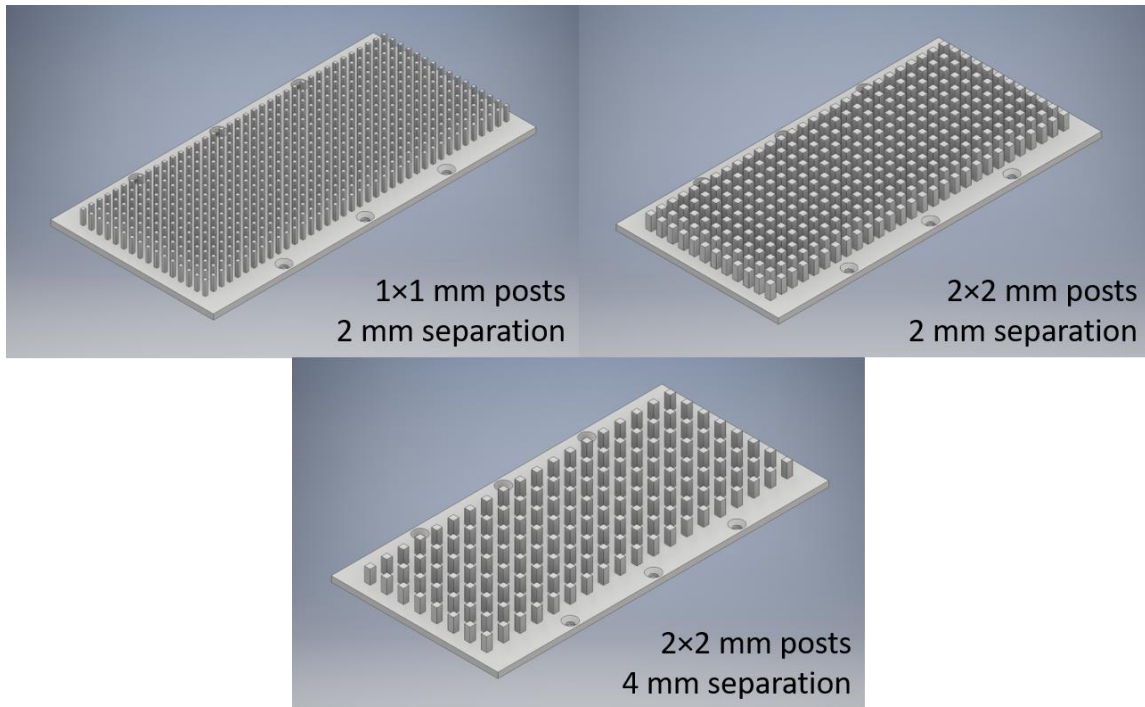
Designs for 3 post TEMHD geometries machined onto base plates for testing in SLiDE with the modified base module.
